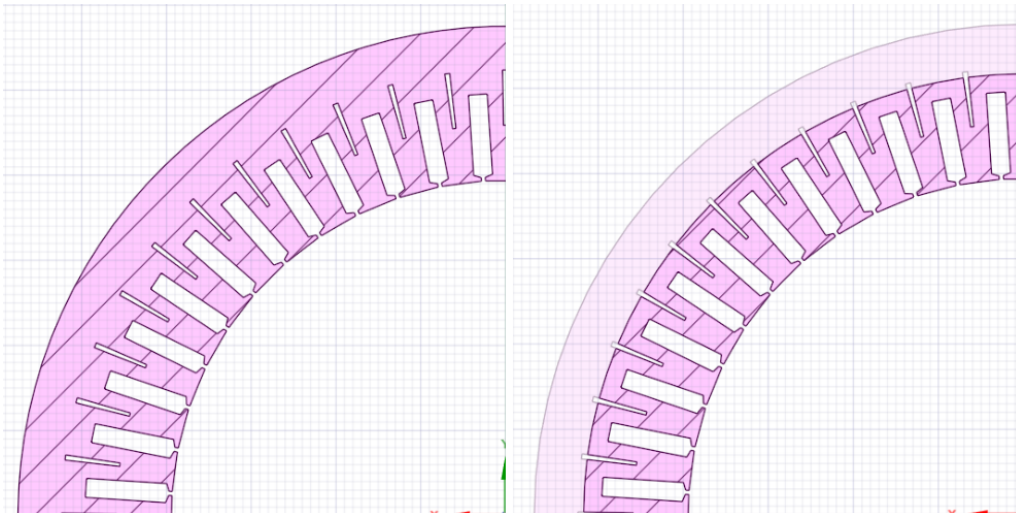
Cross Section of Design 1 Outlet Face
